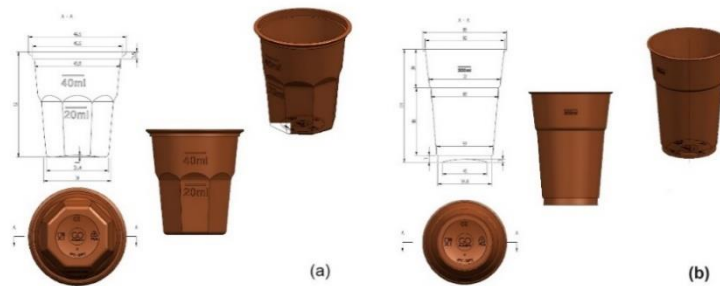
Technical drawings and schematic views of the two types of thermoformed cups:
